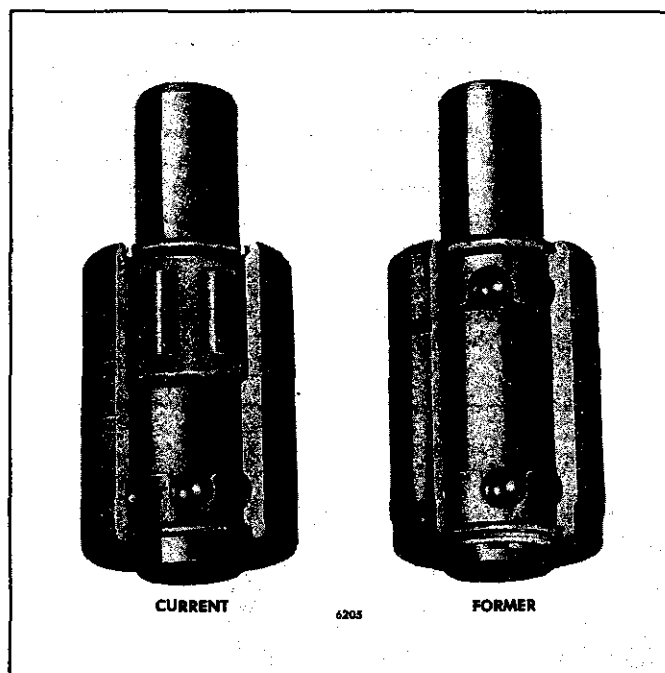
Heavy-Duty Shaft and Bearing Assembly
